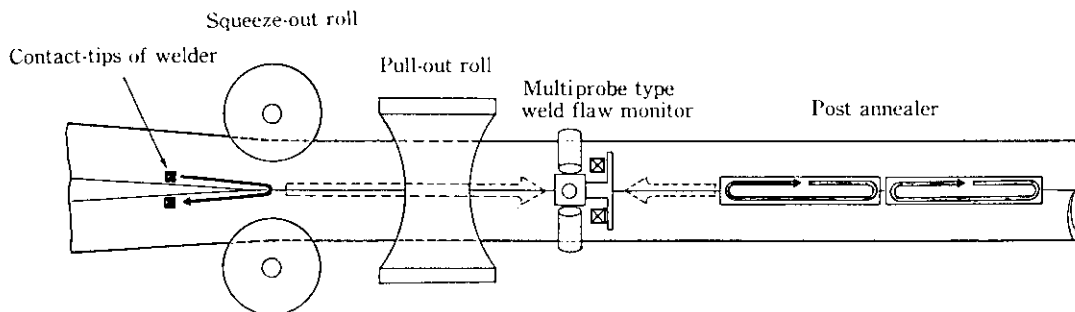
Layout of multiprobe type weld flaw monitor
